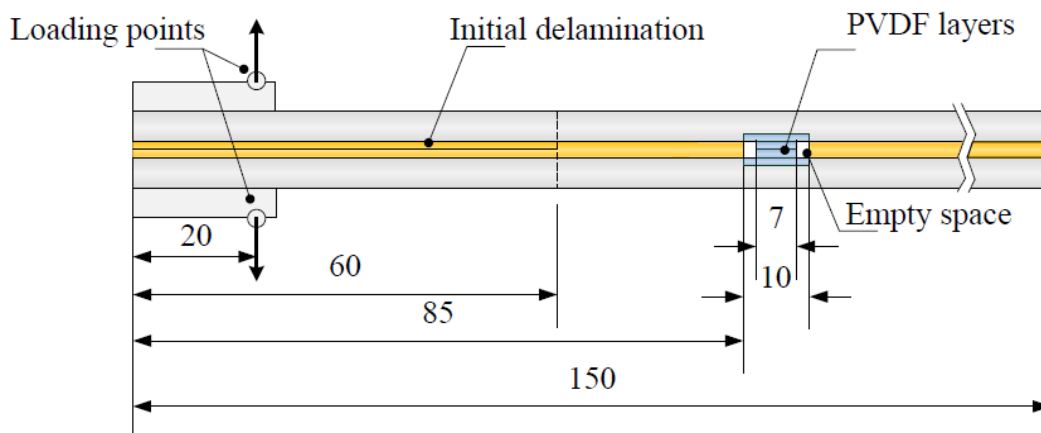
DCB specimen with implemented crack stopper (dimensions in mm)
